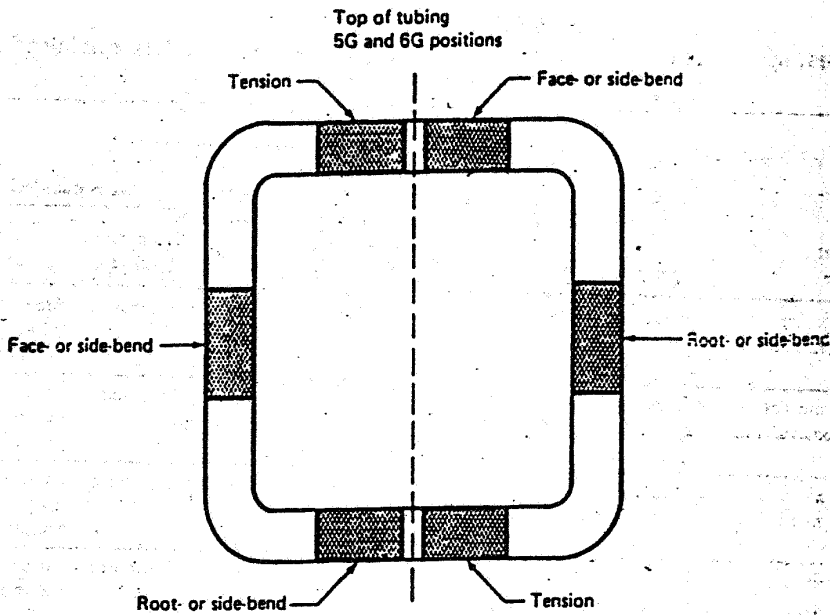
B—Location of test specimens for welded square and rectangular tubing
